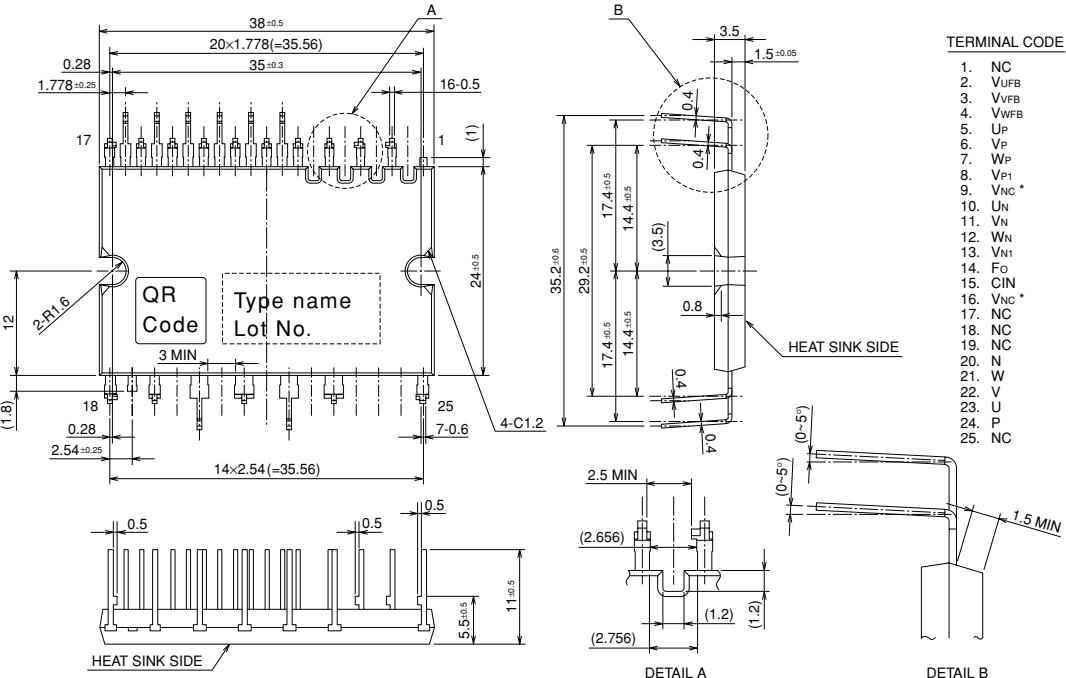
ZIGZAG TERMINAL TYPE PACKAGE OUTLINES (PS21962-4C)
